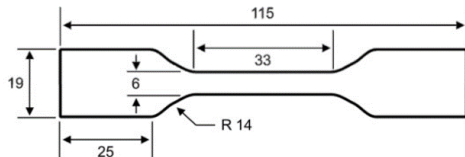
Schematic representation of ASTM D638 Type IV tensile specimen with relevant dimensions in mm.
